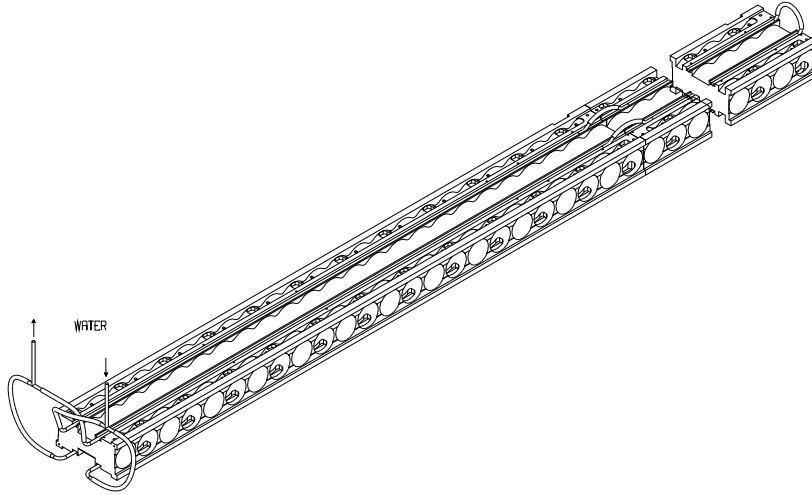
The routing of the cooling tubes inside the superdrawers . A crossed circuit setup is chosen to ensure temperature uniformity. For the straight sections a stiff duralumin tube is glued into grooves of the casted aluminium drawer. For the connections between two drawers and from the drawer to the patch panel as well as for the return loop on the inner end flexible plastic tubes are used.
